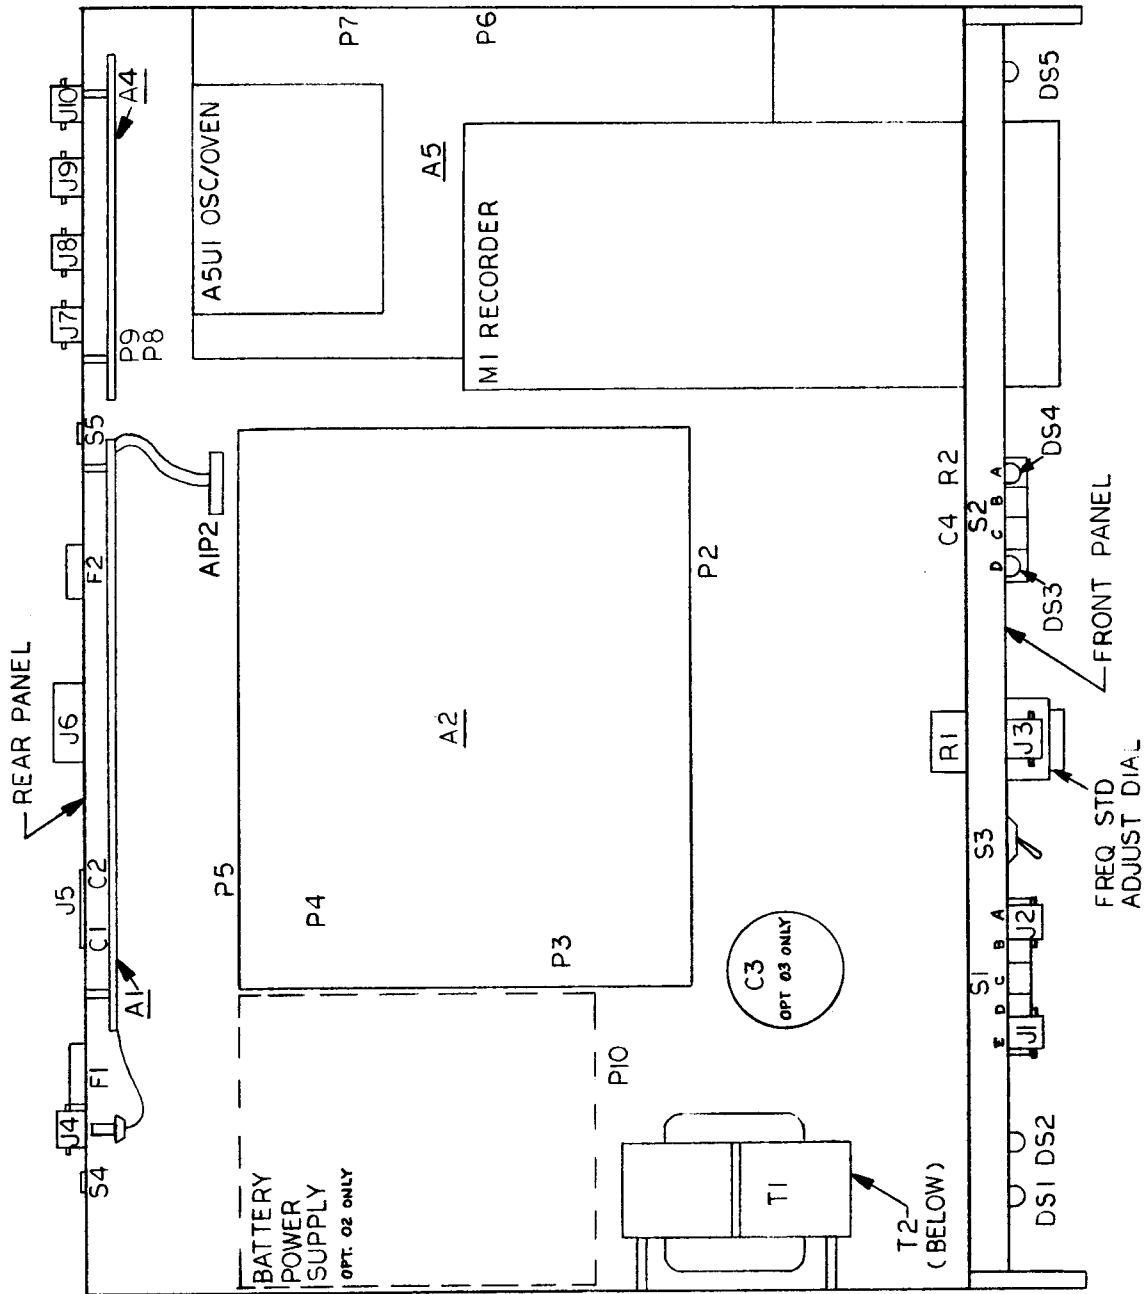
ASSEMBLY DRAWING MAINFRAME
